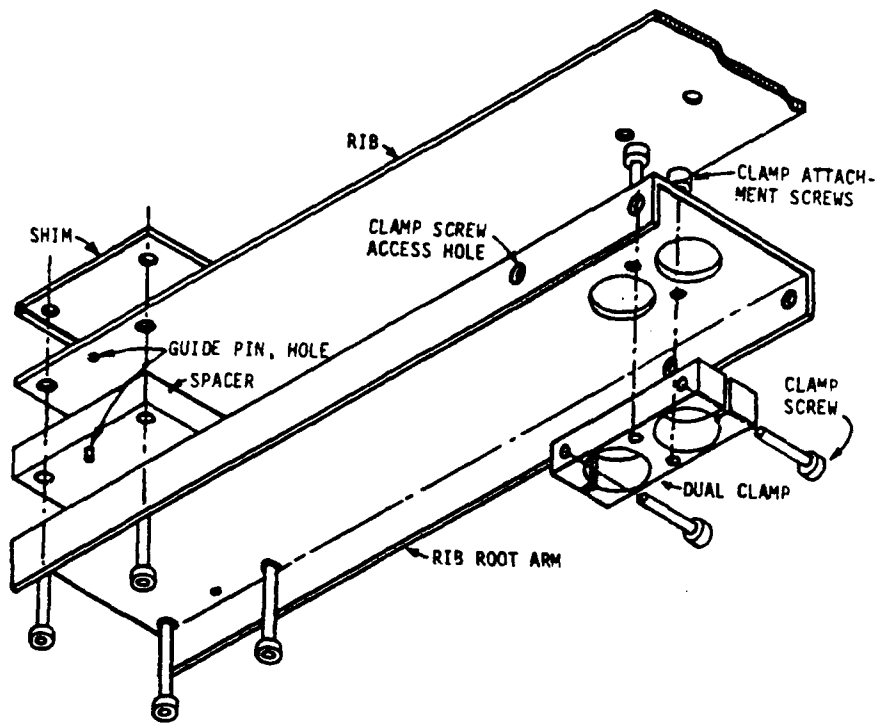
Rib Root Arm Assembly - Underside View
